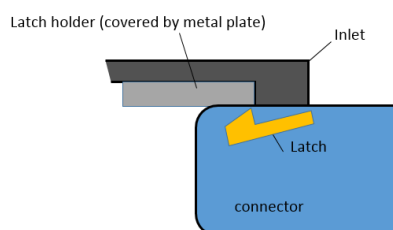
EXAMPLE OF VEHICLE INLET WITH THE LATCH HOLDER COVERED BY A METAL PLATE THAT INHIBITS LATCH HOLDING
